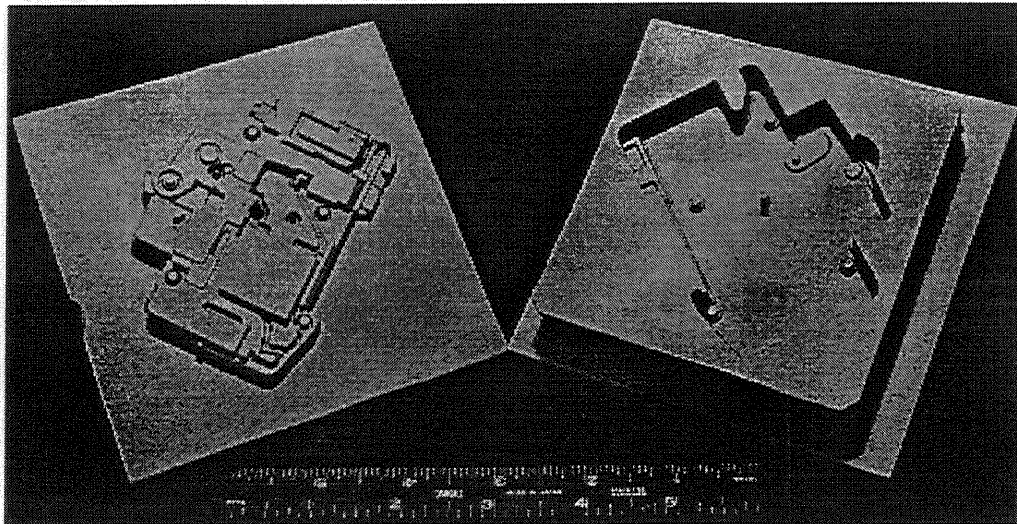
Steel-copper core and cavity inserts produced by the RapidTool process.
